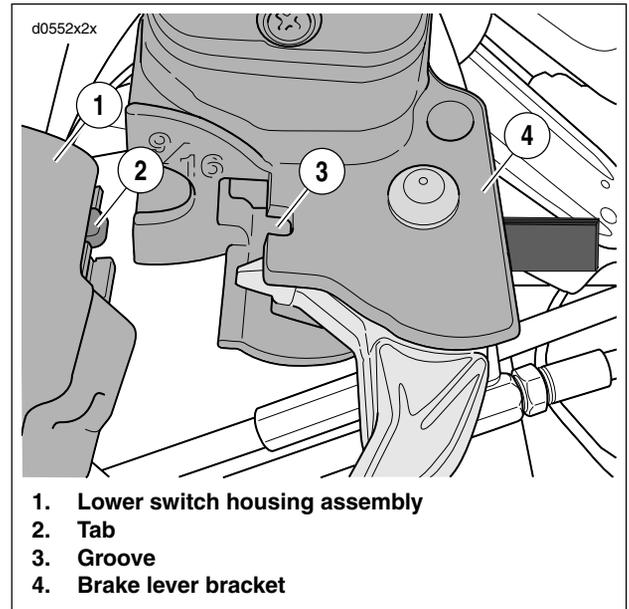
Master Cylinder and Brake Lever Bracket To Handlebar Switch Housing
